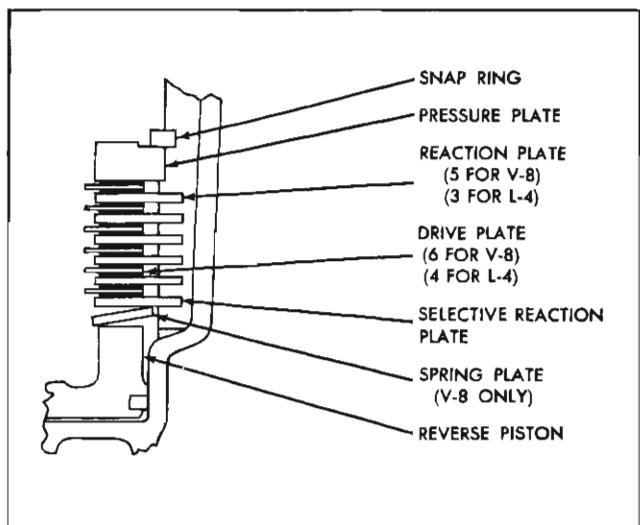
A-57 Reverse Clutch Plate Assembly Sequence
